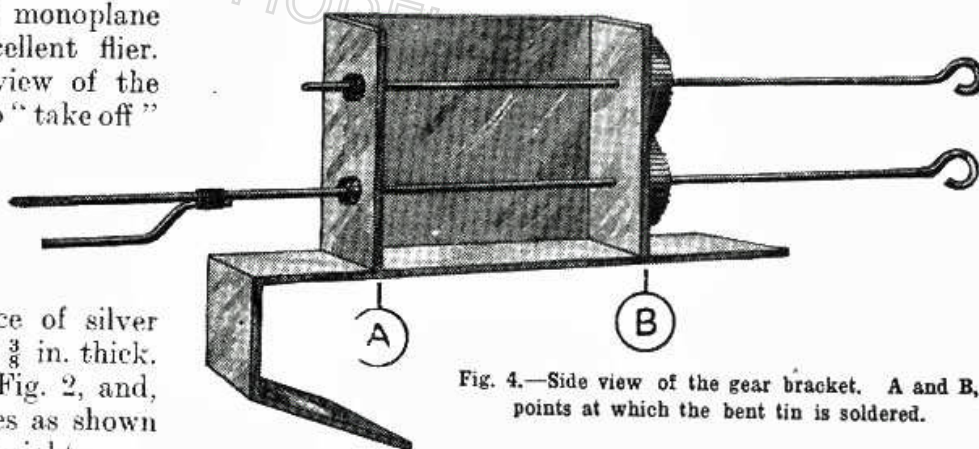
Side view of the gear bracket. A and B, points at which the bent tin is soldered.
